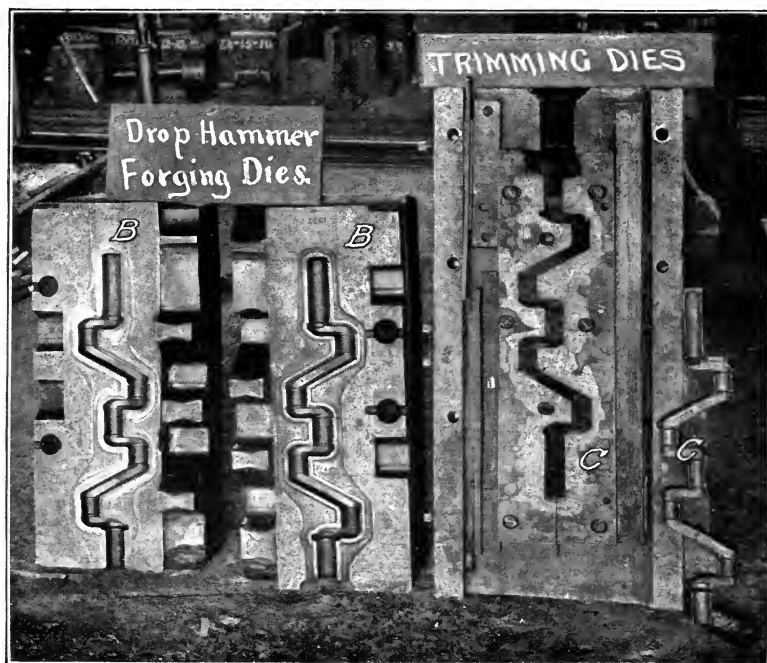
Dies for Forging and Trimming a Small Crank Shaft.
